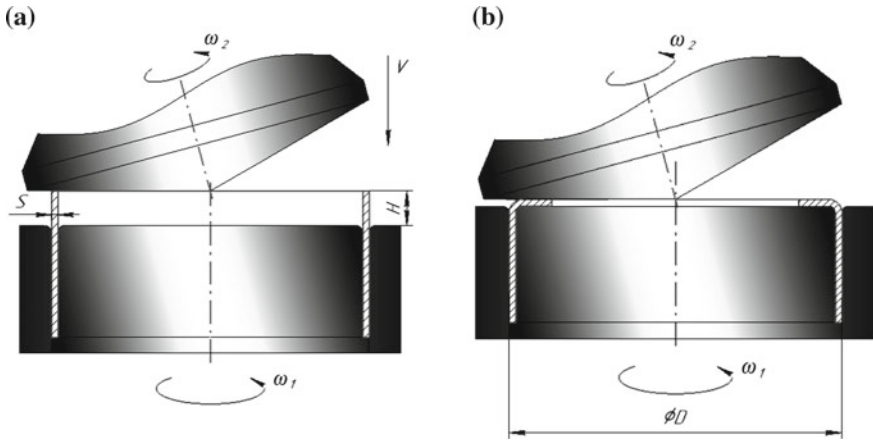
Scheme of axial rotary forging of tube blanks: initial (a) and final (b) stages of the process
